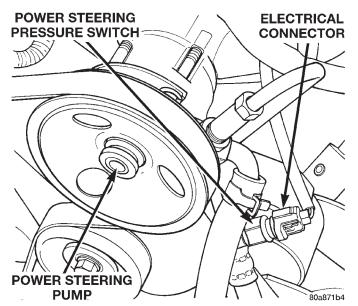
Power Steering Pump Pressure Switch—2.5L Engine
